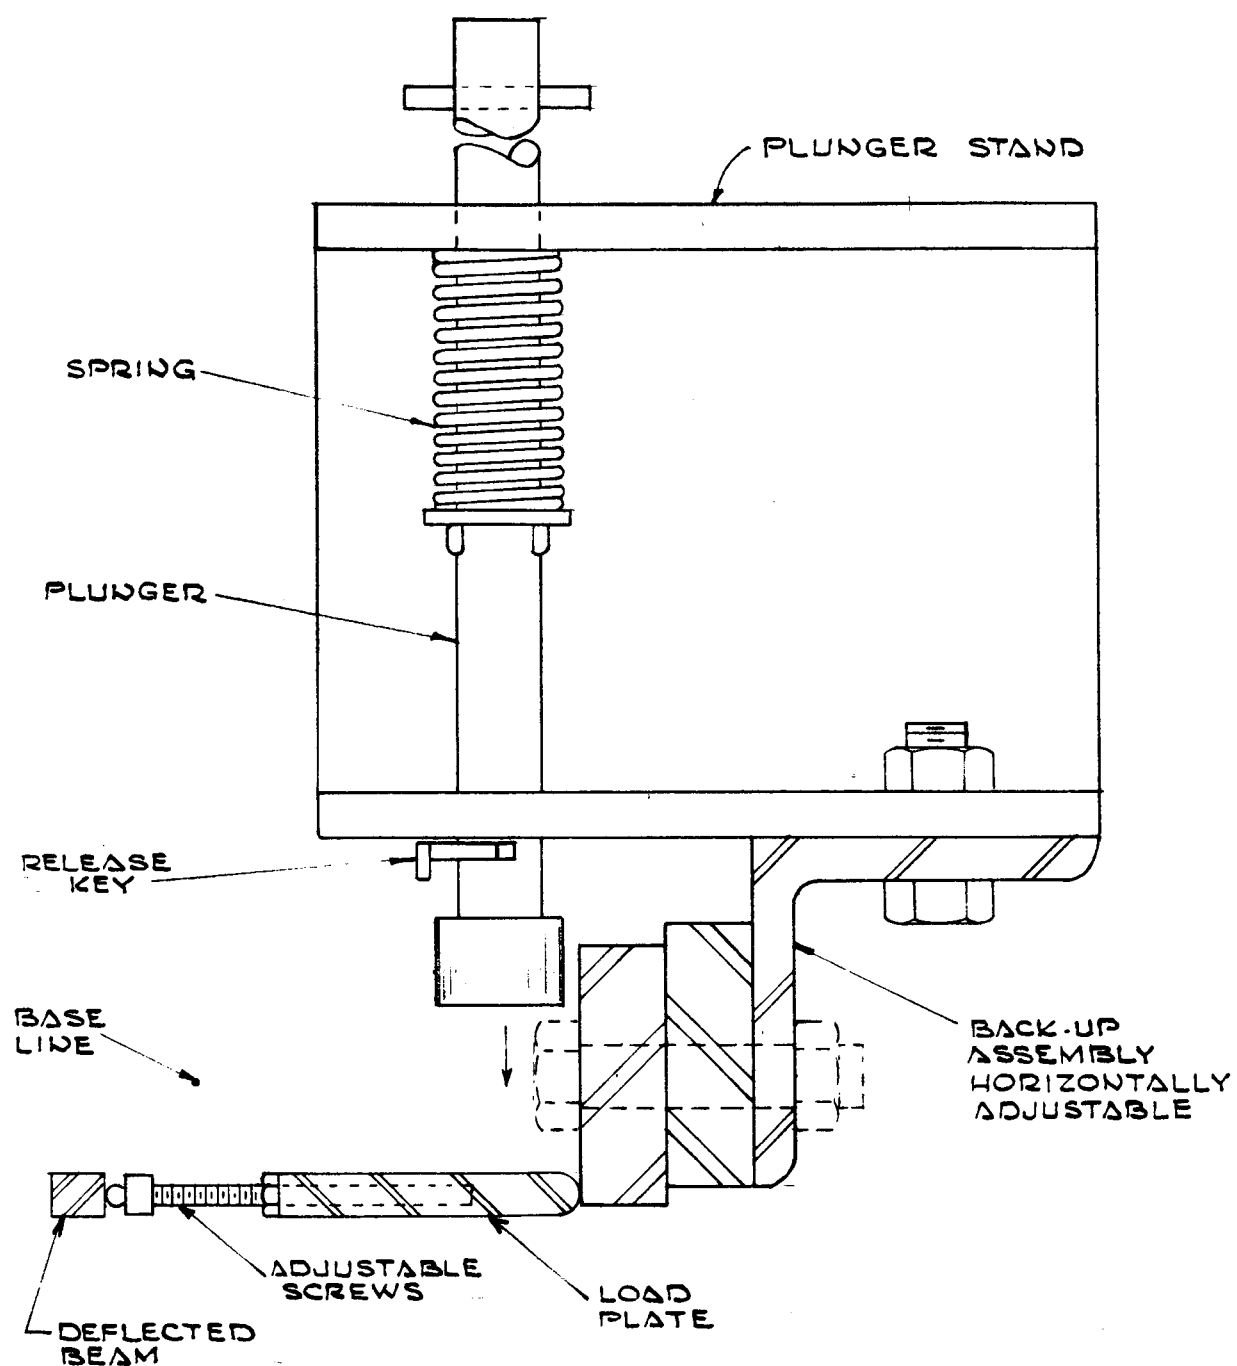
SKETCH OF SPRING LOADED PLUNGER ASSEMBLY COCKED AND READY TO STRIKE LOAD PLATE
